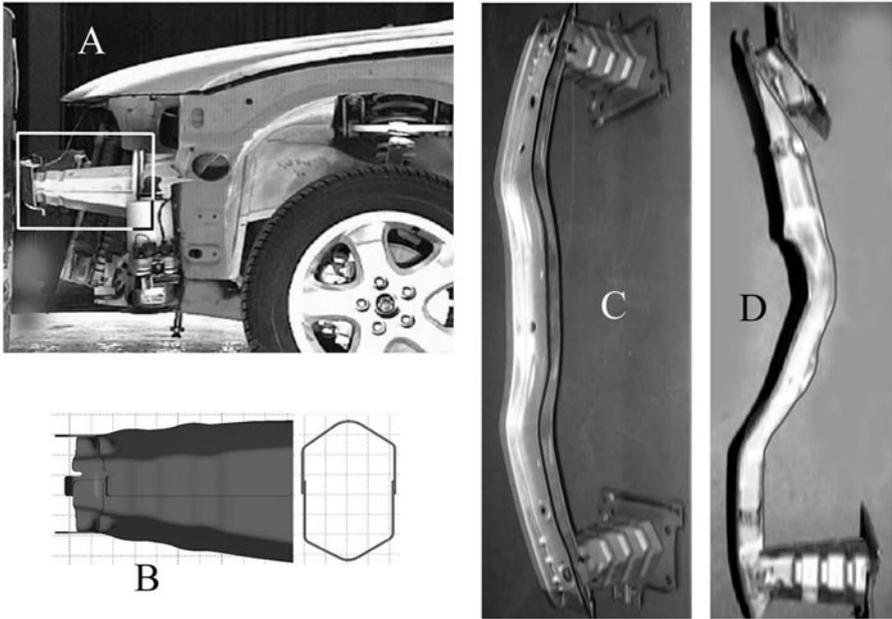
Example of body installed crash box (A), view and section of absorbing device (B), bumper beam and crash box assembled (C) and deformed after offset impact test (D).
